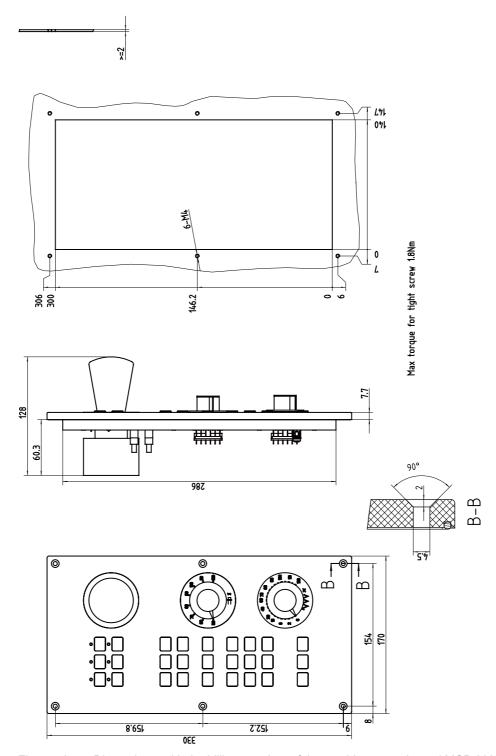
Dimension and hole drilling template of the machine control panel MCP 802D sl
